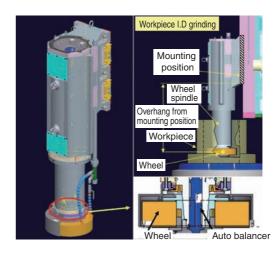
High-rigidity wheel spindle with built-in auto balancer
